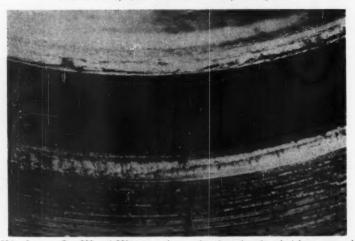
Same as Fig. 222 and 223 except that machined steel surface had been removed prior to plating. Fracture was ductile and occurred at 90,000 psi in nickel plate, part of which entirely covers steel surface (bottom). 13X
